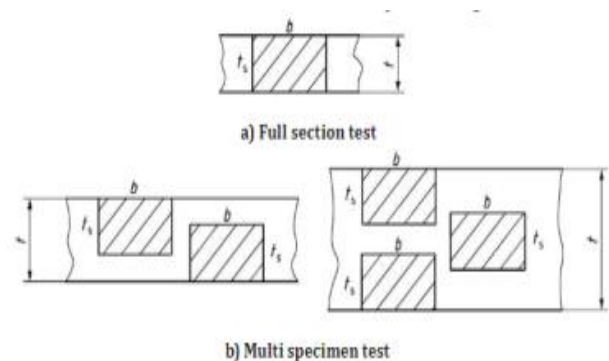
Location of test specimens depending on the thickness of the welded joint [8]
